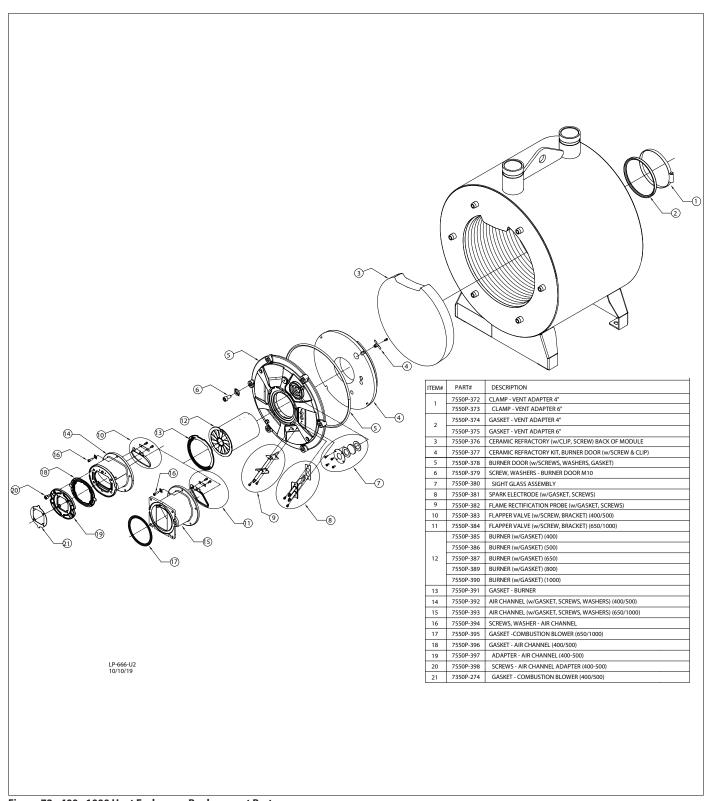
400 - 1000 Heat Exchanger Replacement Parts
